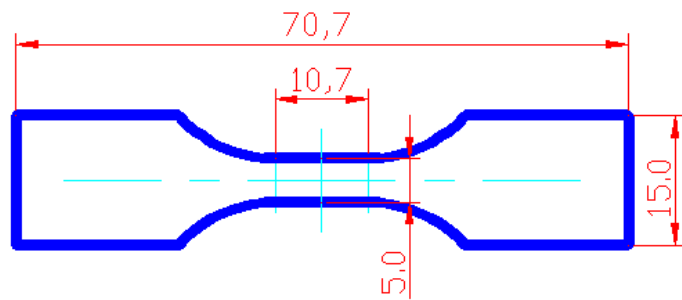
Tensile test specimen(Thickness:1.0mm).
